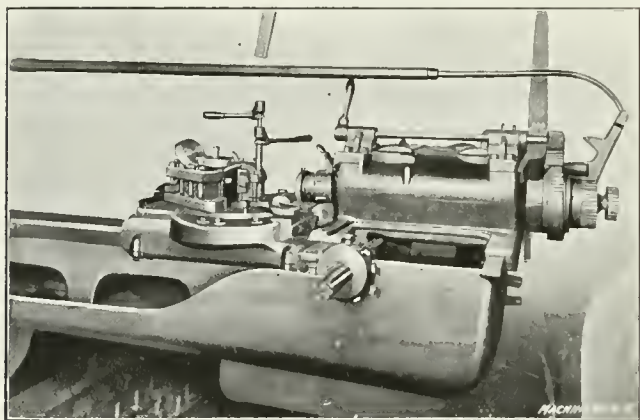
Jones & Lamson Turret Lathe equipped with Muehlmann Chuck Operator
